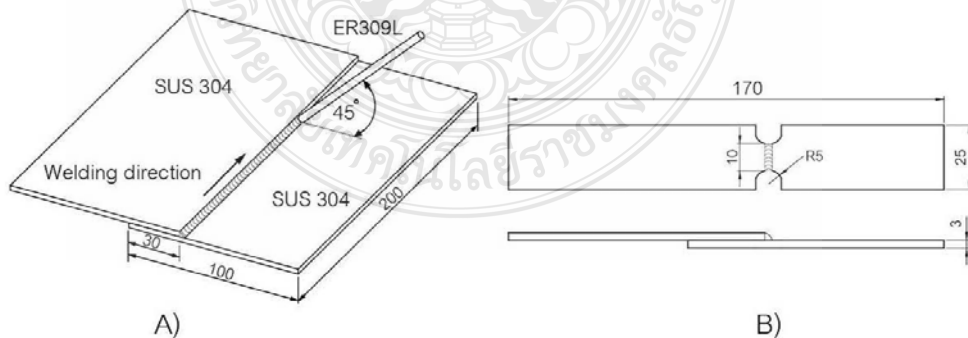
Schematic of Lap joint welding: (A) Dimension of lap joint and (B) Tensile shear specimen.
